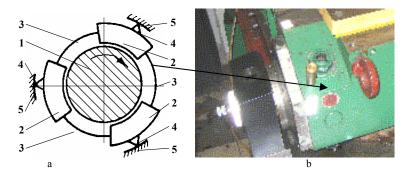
Investigated system: a - segmental sliding bearings 1 - rotor, 2 - segments, 3 - elastic coupling, 4 - adaptive thrust, 5 - spindle head; b - photo
